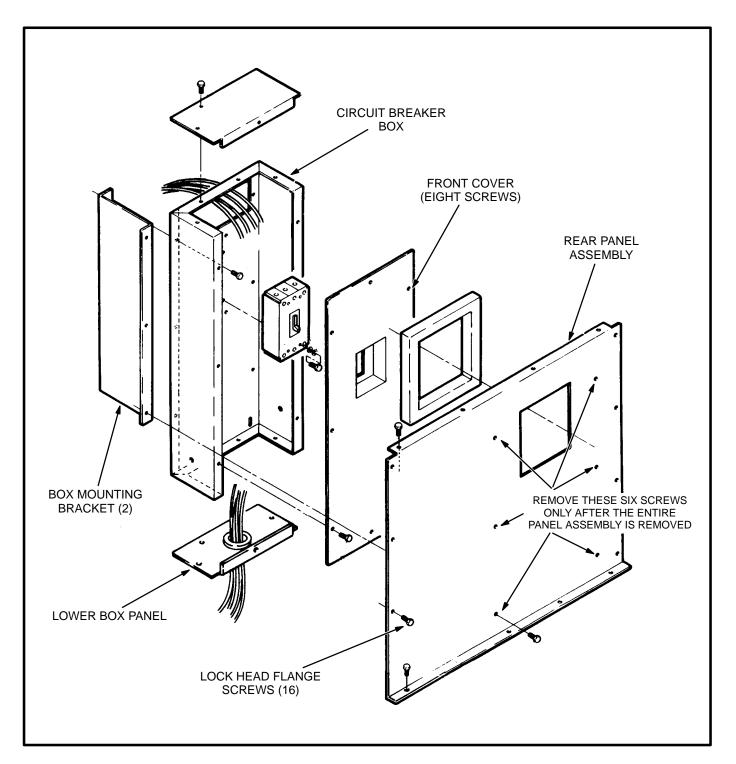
REAR PANEL ASSEMBLY ATTACHMENT TO GENSET
